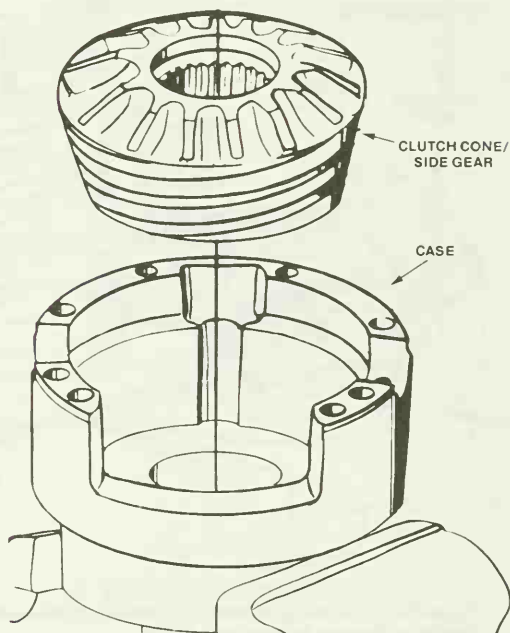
Installing the cone/gear assembly. (Pontiac Motor Division of General Motors Corporation)
